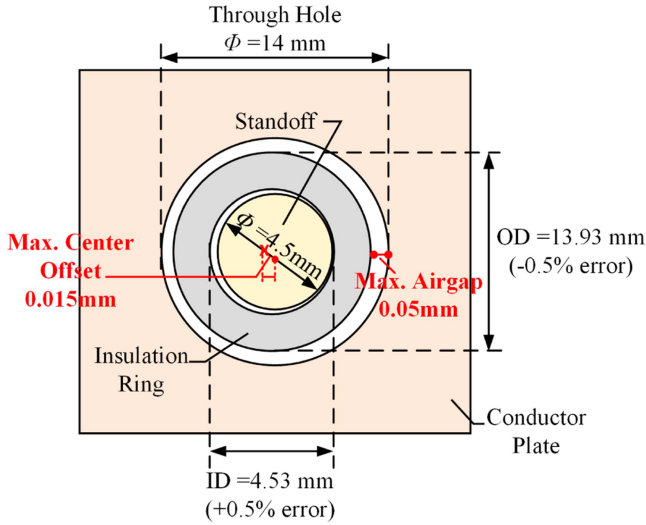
Demonstration of insulation ring offset inside the bus bar through holes caused by manufacturing tolerance.
